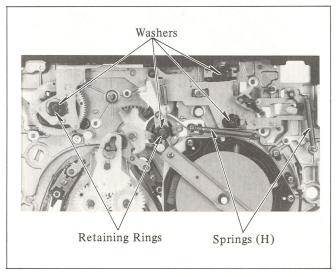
Assembly and Adjustment of Gears and Rods-(7)
